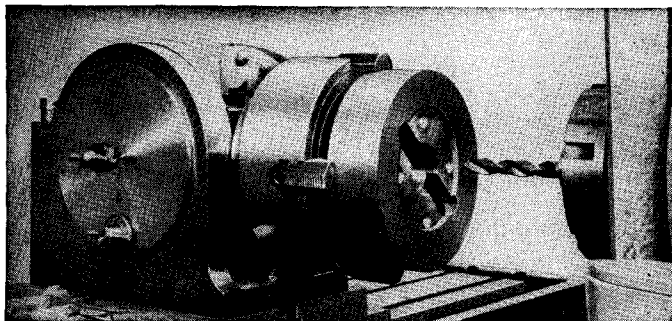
Using the index head to locate holes at specified angles. (The Cincinnati Milling Machine Company)
